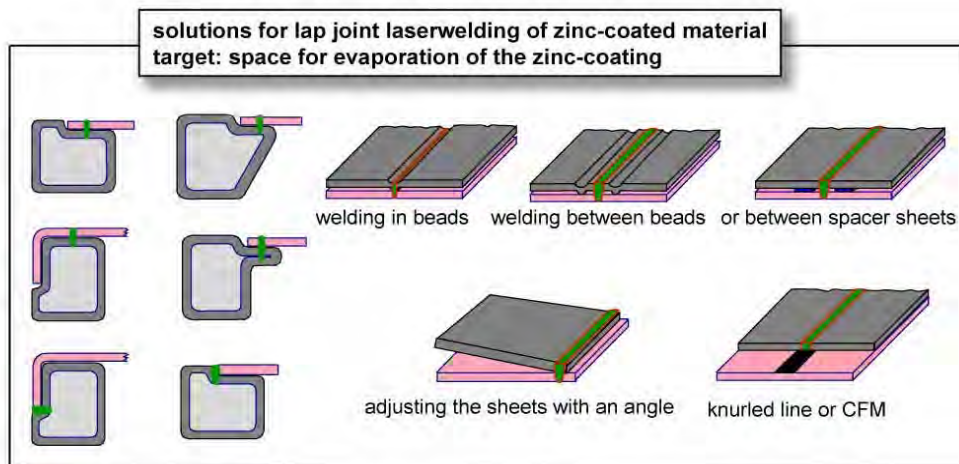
J-12: Laser welding of Zn-coated steels to tubular hydroformed parts^{L-3}
